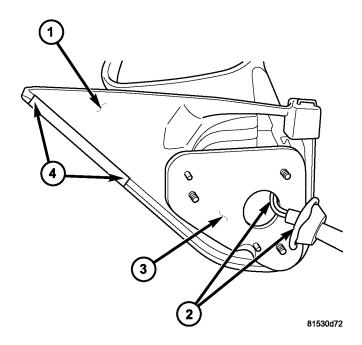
OUTSIDE MIRROR - BACKSIDE VIEW
